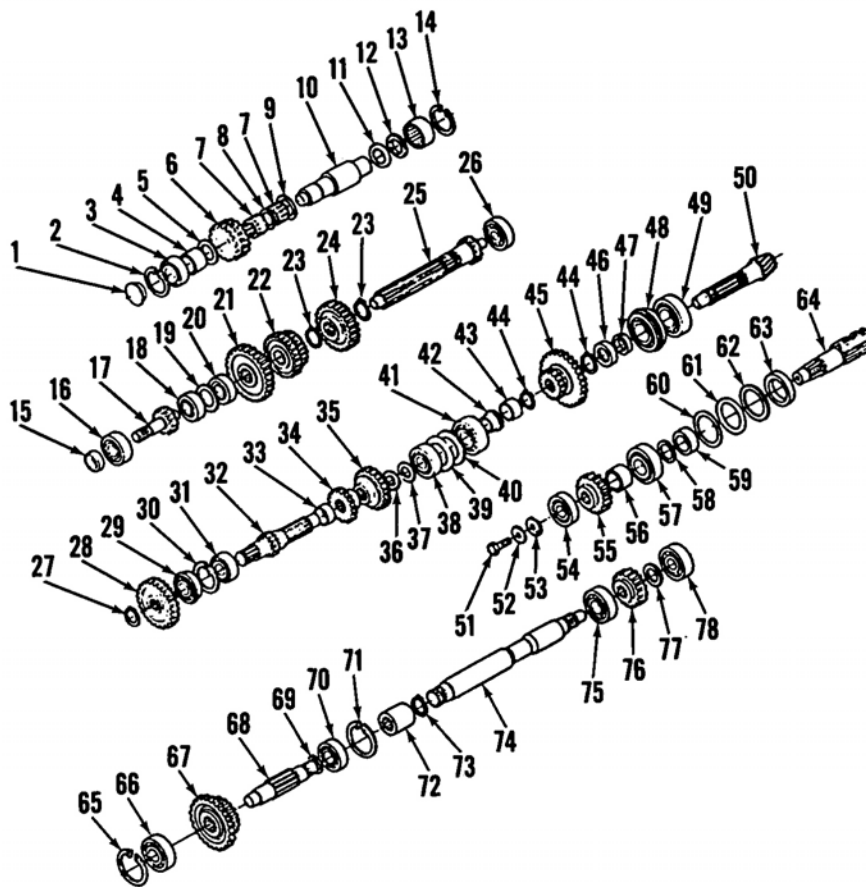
Exploded view of transmission gears, shafts and other components showing relative installed position used on Model B5100E.
